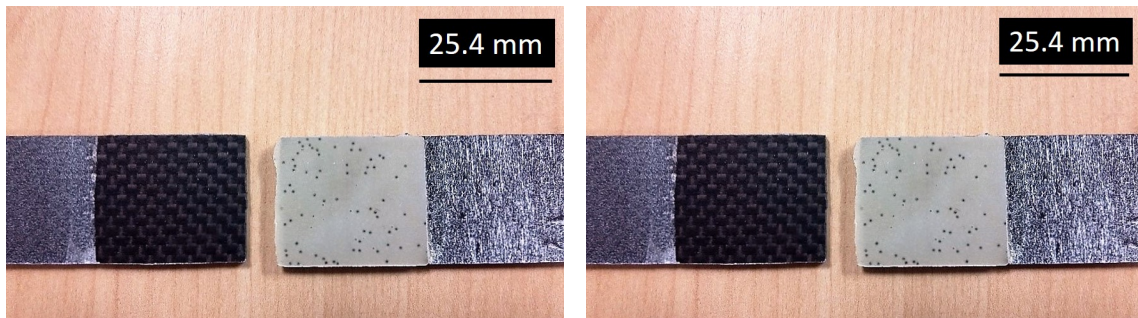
(a) Top view of adhesive failure; (b) Top view of cohesive failure.
